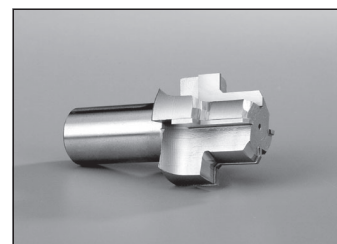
BSPP Straight Thread Port Counterboring Tool
